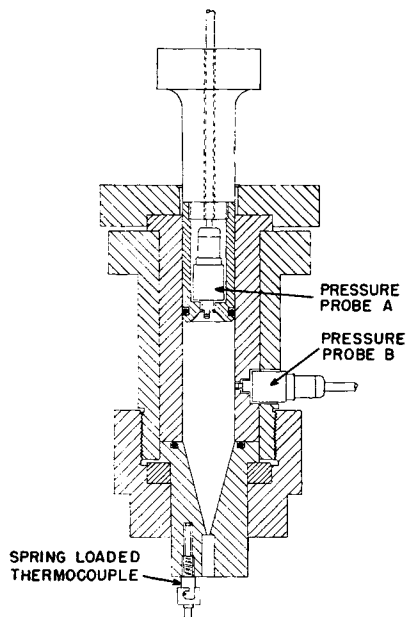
Rheometer die assembly (1 $\frac{1}{4}$ -in. diameter).
